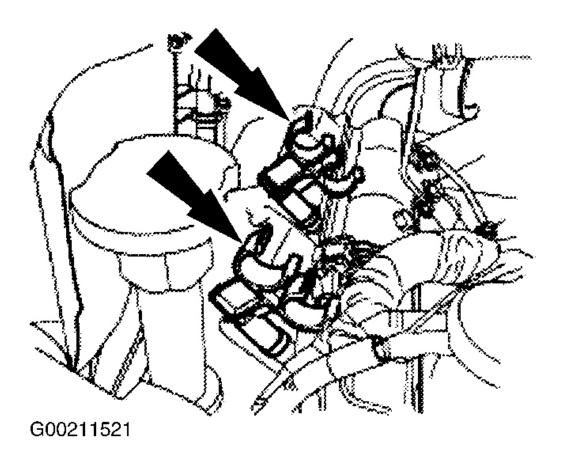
Removing & Installing Heater Hoses (Excursion & "F" Series) Courtesy of FORD MOTOR CO.
